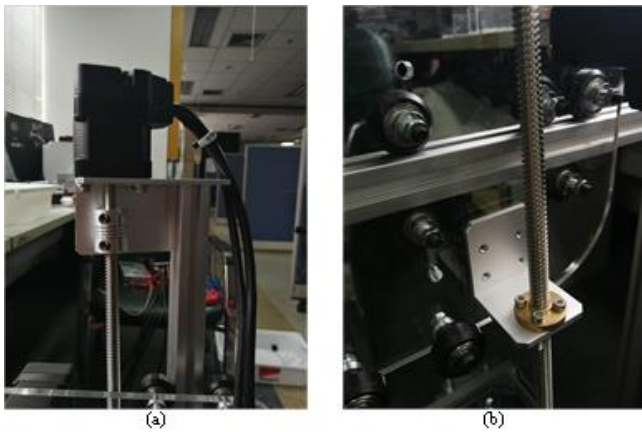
Lead screw mechanism: (a) Top and (b) Bottom view.
